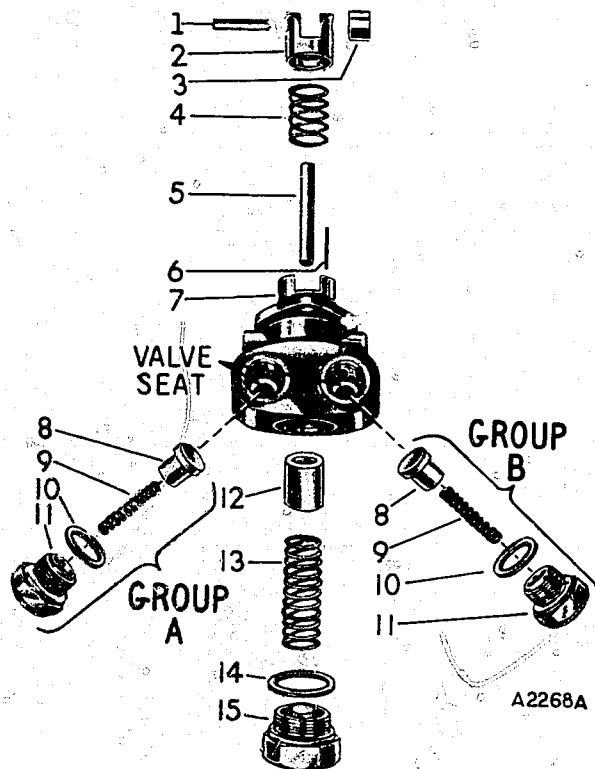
EXPLODED VIEW OF SPA SUPPLY PUMP
